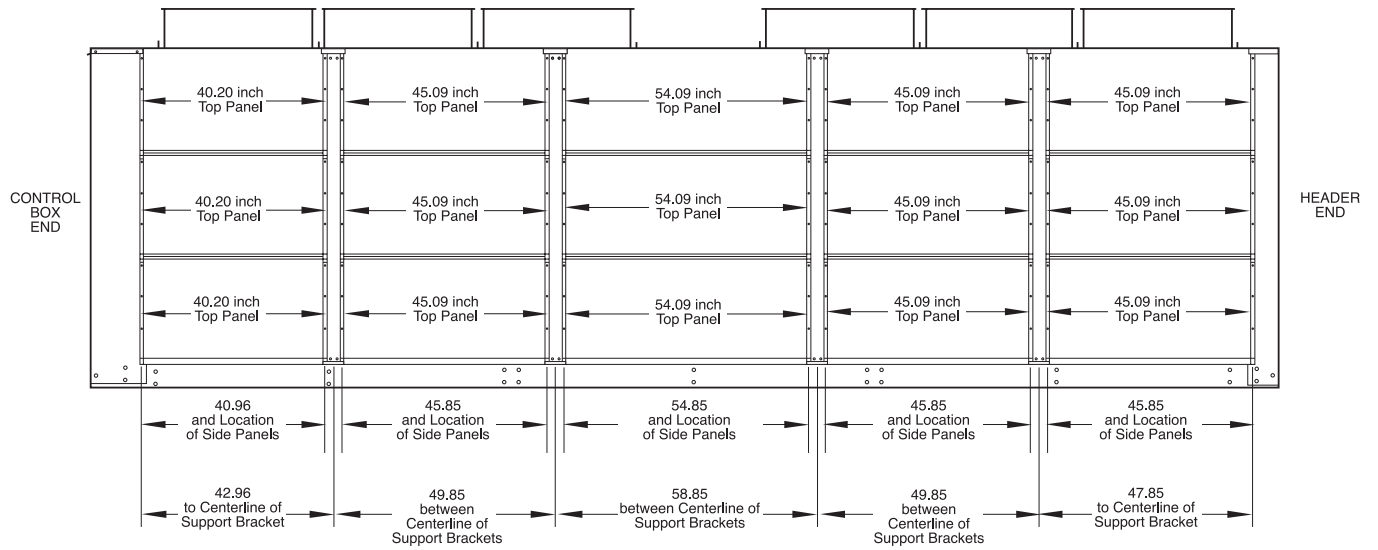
C — Unit Assembly, 30GXN,R118,128,138,150,160 and Associated Modular Units — Both Sides
